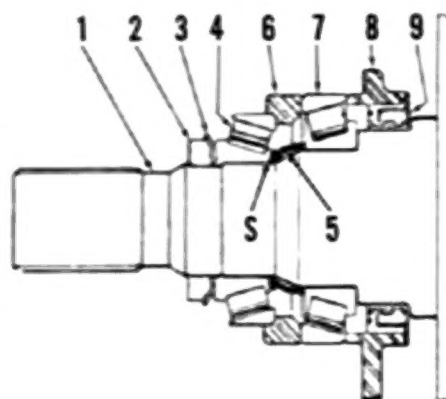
View showing bearing assembly installed on outer axle shaft.
